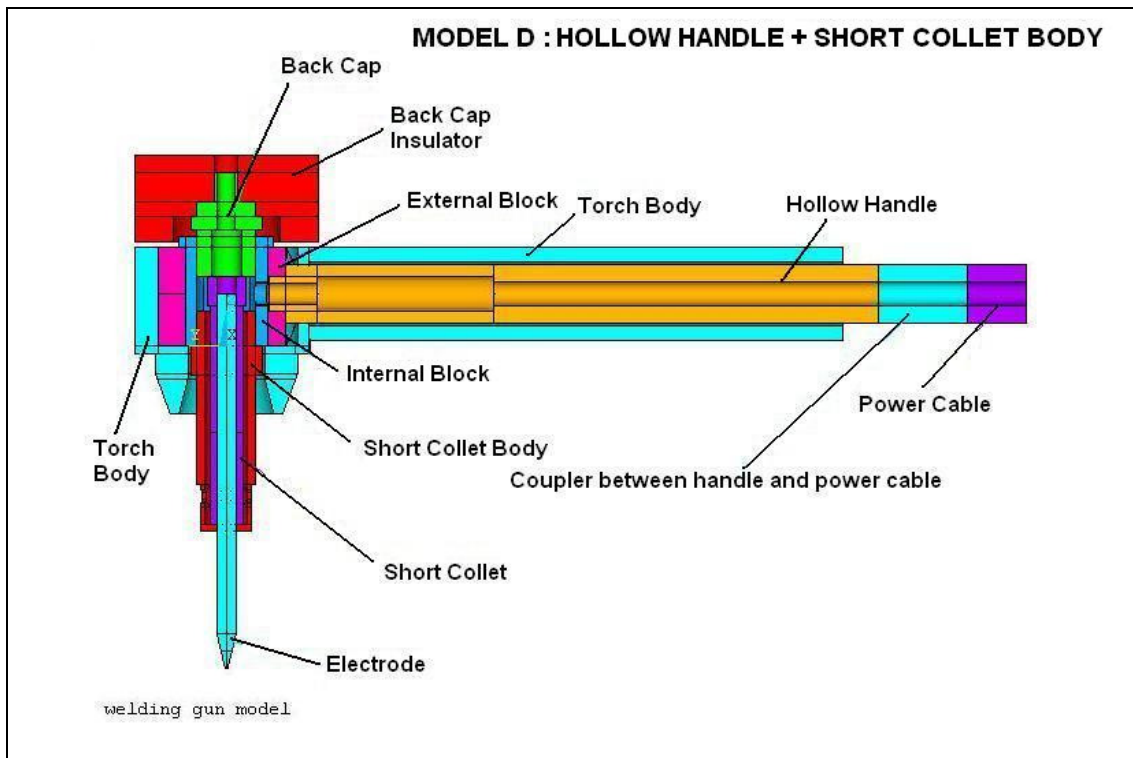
Cross-sectional view of welding torch model D.
